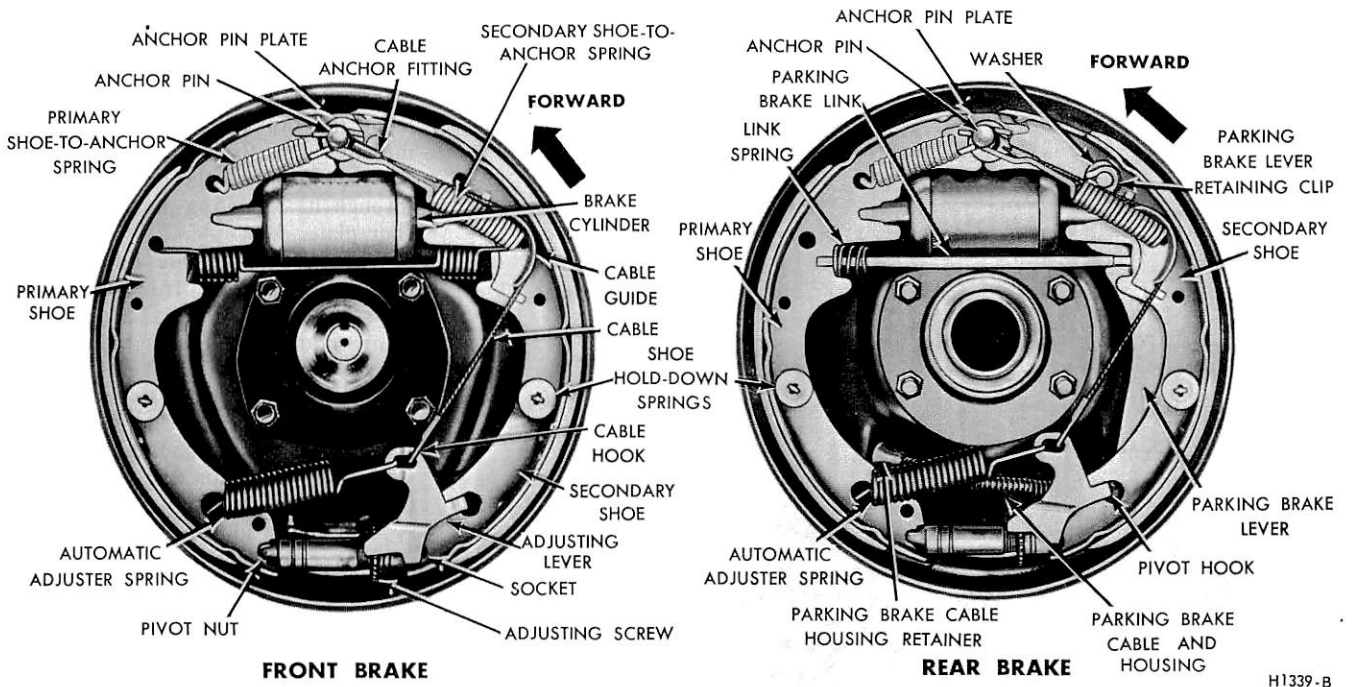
Self Adjusting Brake Assemblies—F-100 Series
